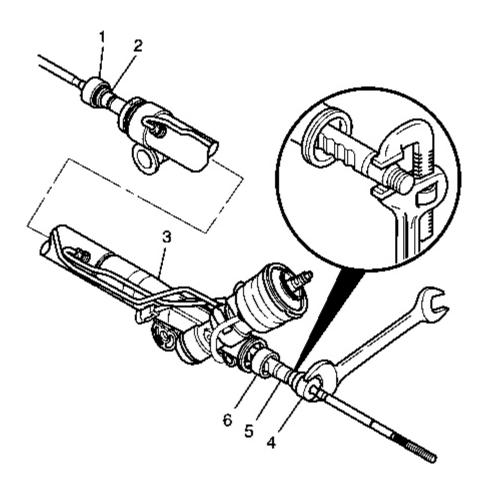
View of Shock Dampener, Inner Tie Rod Housing, and Rack Courtesy of GENERAL MOTORS CORP.
